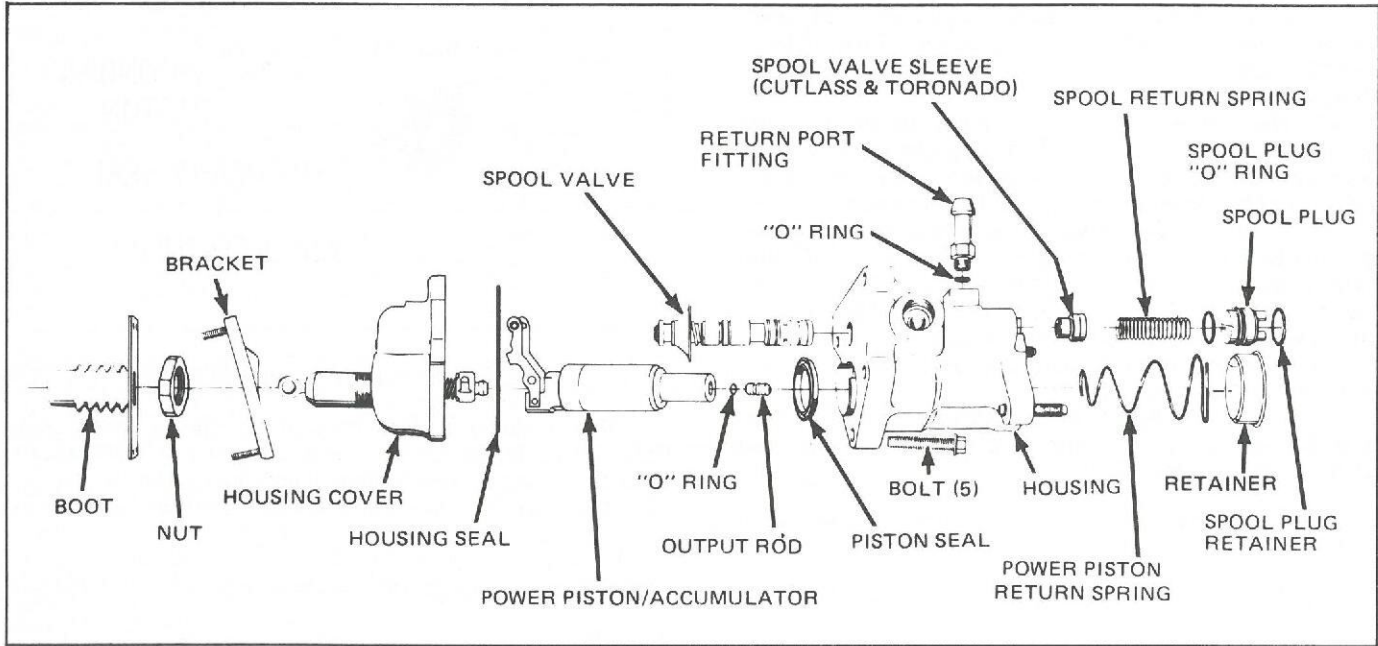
Hydro-Boost Assembly - Replaces Figure 5-44
